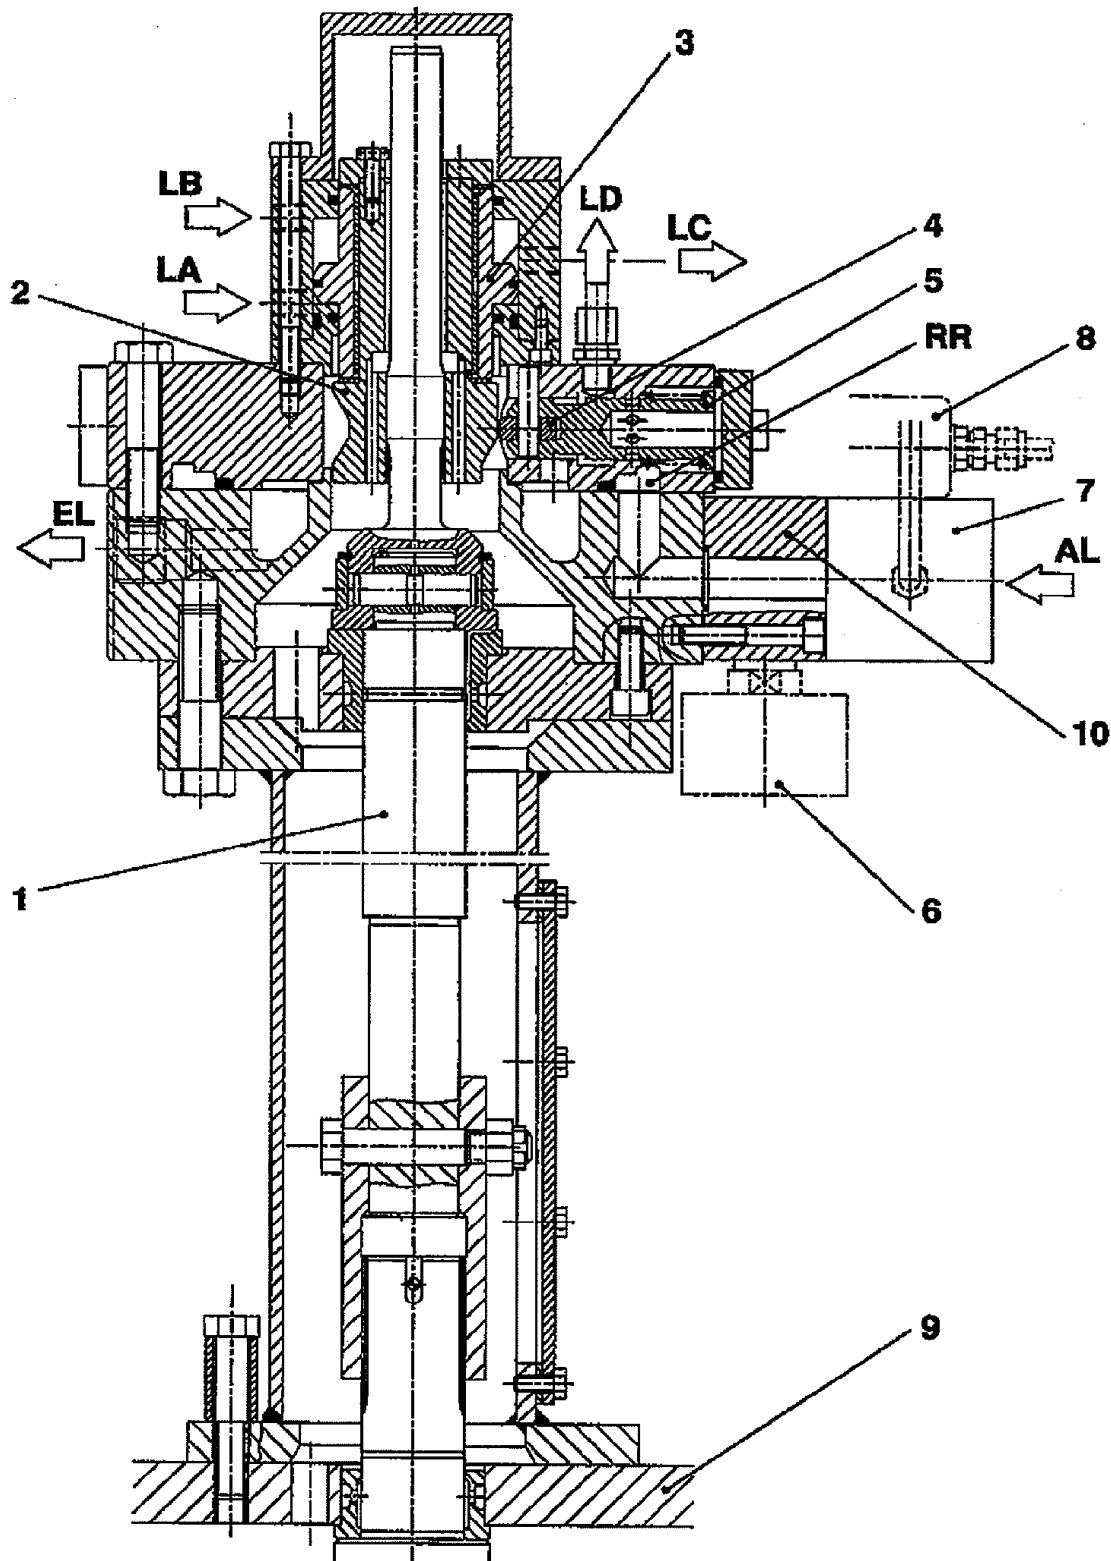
Cross sectional view of Starting air distributor for SULZER RTA84 T-B engine
